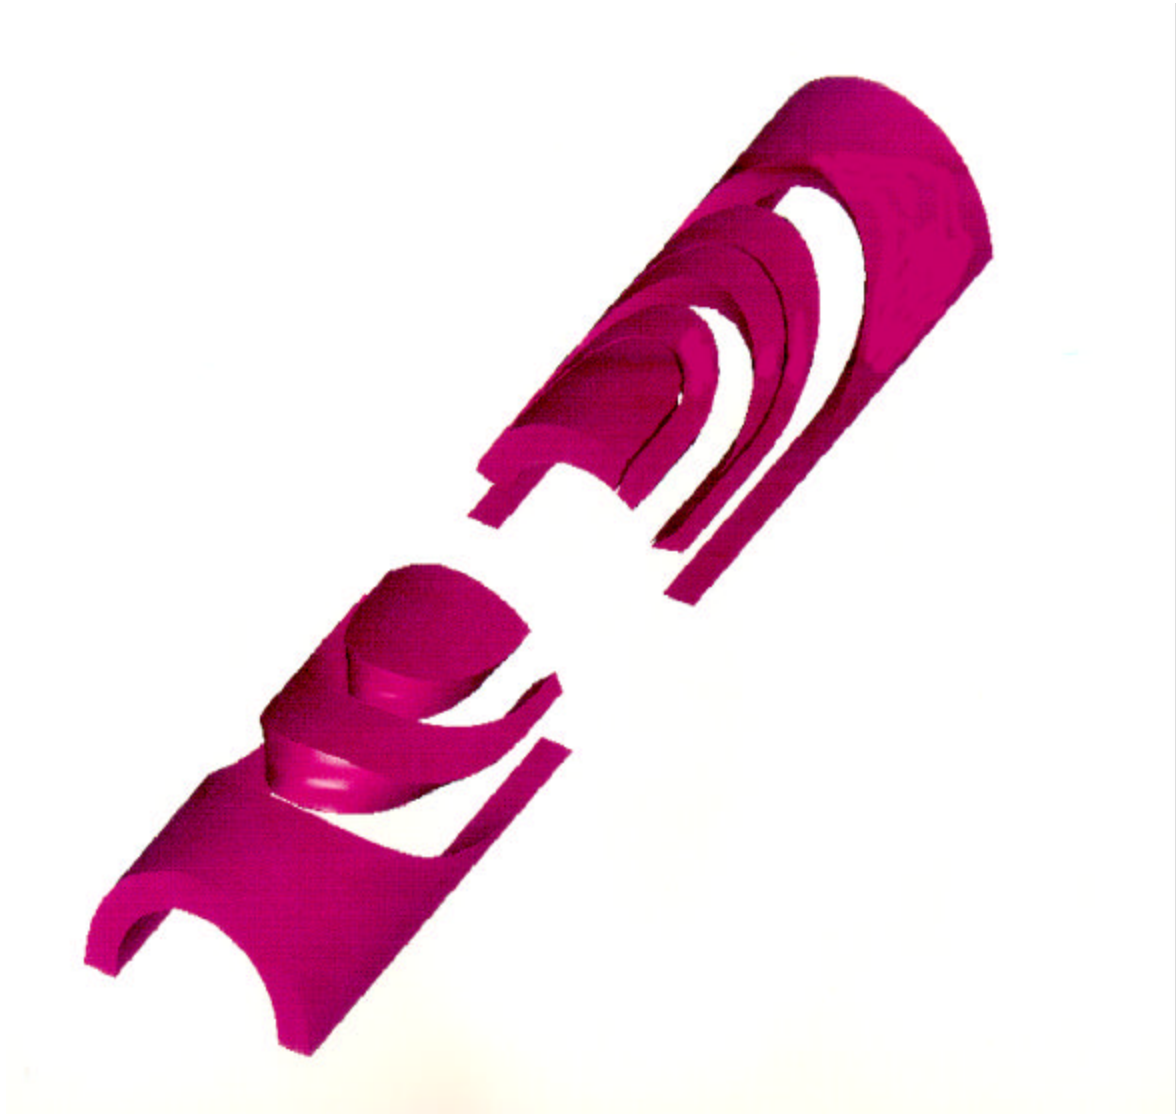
3-D solid model for the outer layer end parts for the first mechanical model magnet.
